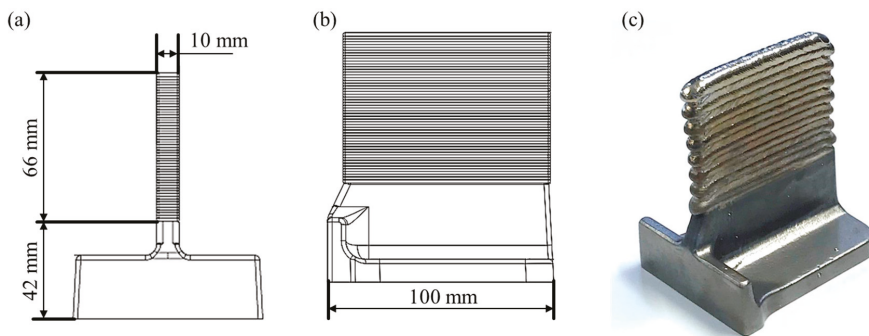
Drawing of the final pre-form with dimensions. Front view (a), side view (b), final appearance of the hybrid near-net shape demonstrator (c).
